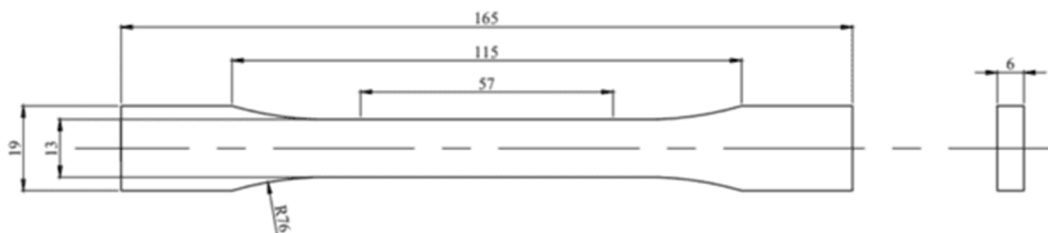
2D Drawing of ASTM D638 Type I Standard Specimen
